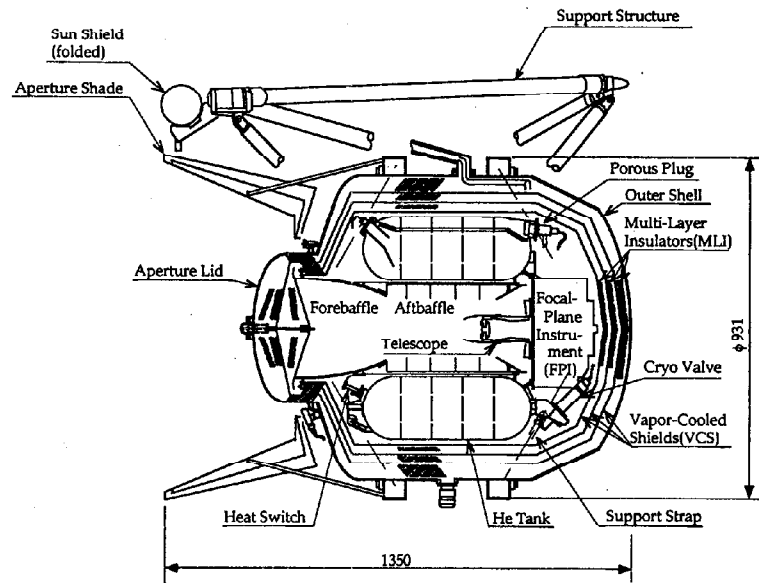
Cross sectional view of the IRTS. Typical dimensions are indicated in millimeters
